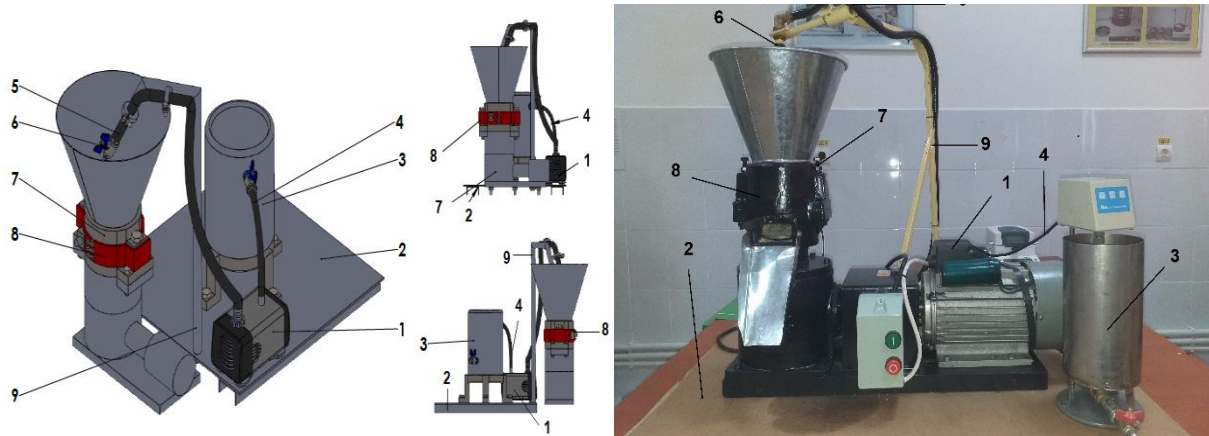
Design and layout of the equipment used to produce pelletized feed
